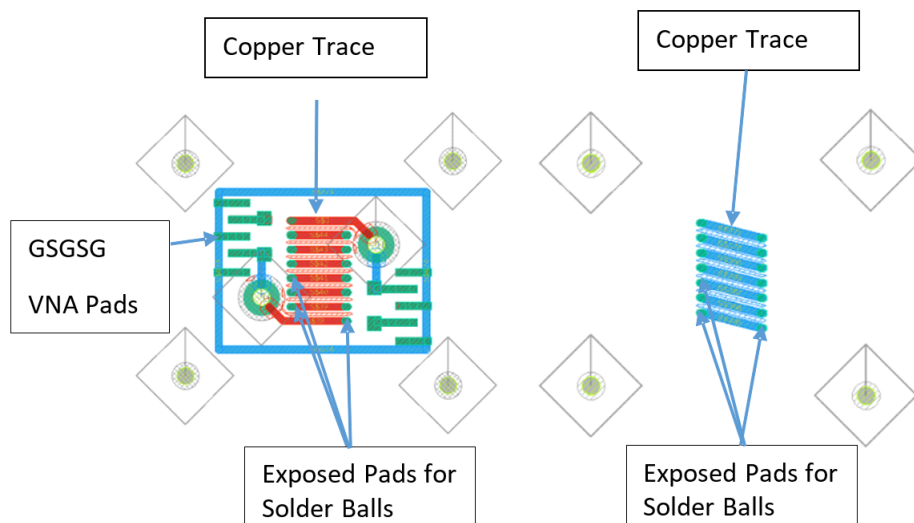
PCB schematic diagram of Gen II Flip-Chip Inductor. (Left) lower PCB; (Right) upper PCB.
